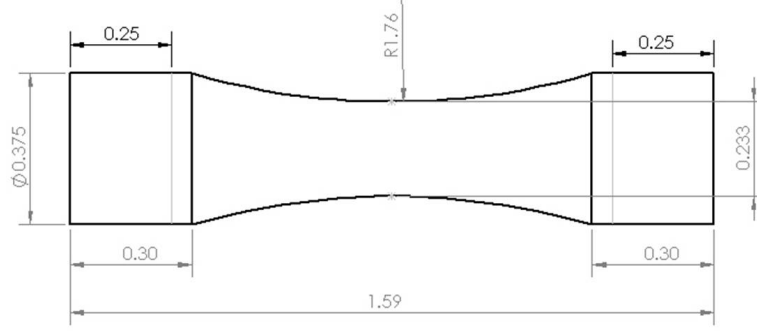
Tensile specimen dimensions for out of plane tensile testing (in.).
